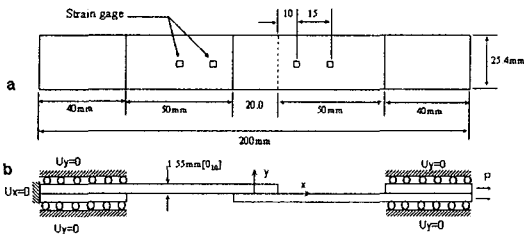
Geometry and dimension of the composite single-lap joint specimens.
